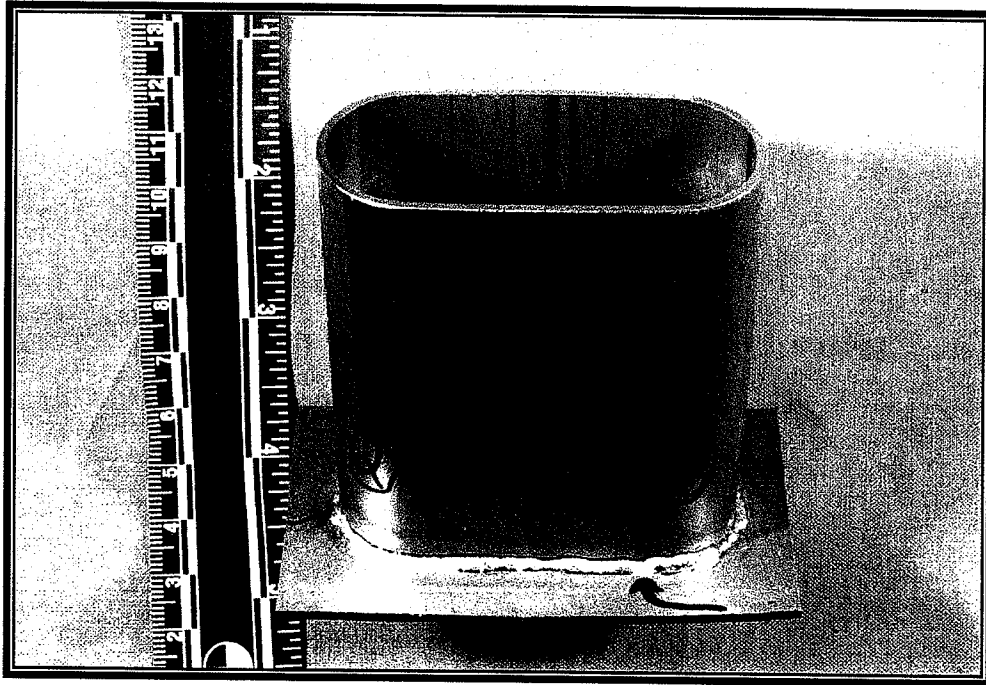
Typical weld specimen after separating the test sample into sections.
